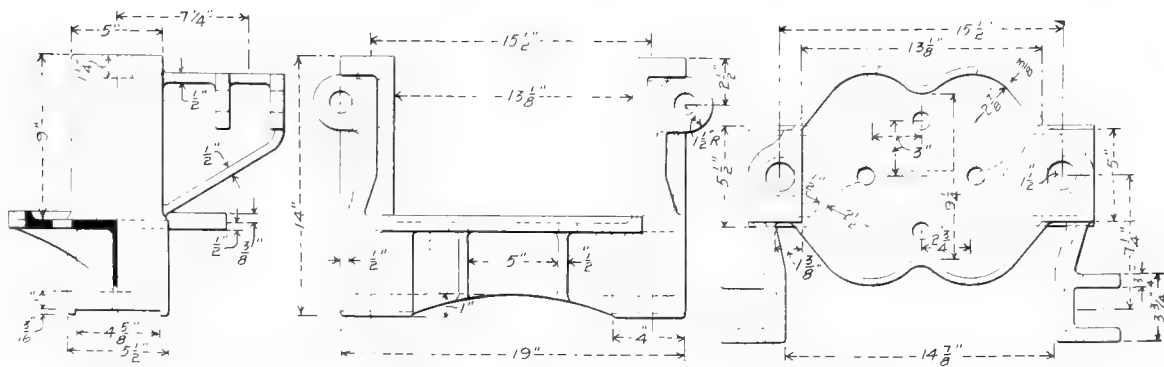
Cast Steel Combined Truck Column or Bolster Guide, Brake Hanger and Spring Seat. American Steel Foundries.
